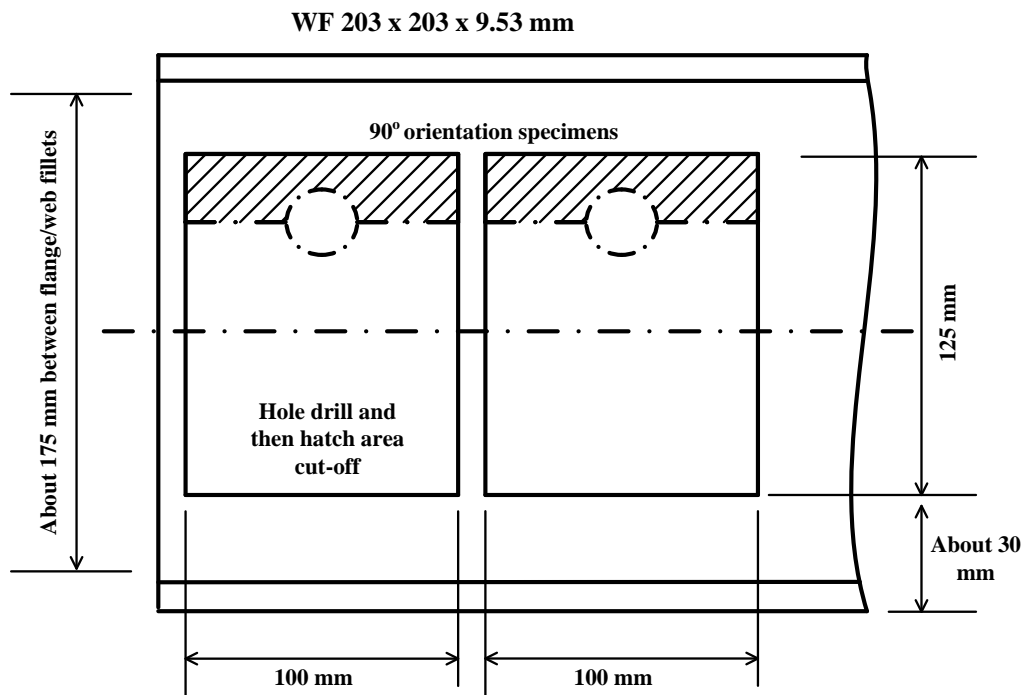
Blanks specimens and cutting pattern for the 90° specimens.
